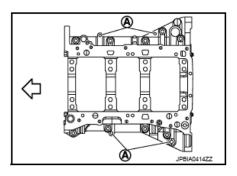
Identifying Cylinder Block Bolt Holes Courtesy of NISSAN NORTH AMERICA, INC.
